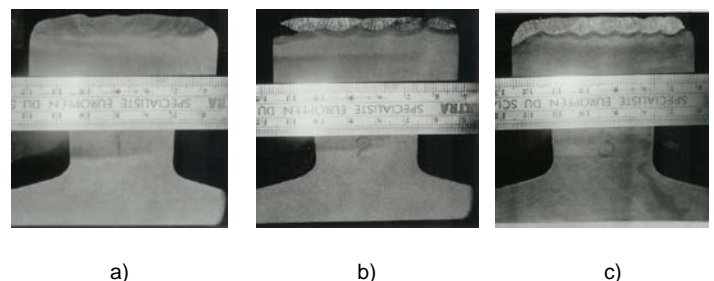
a) welding with Lincore 33; b) welding with Lincore M; c) welding with Lincore 15CrMn
